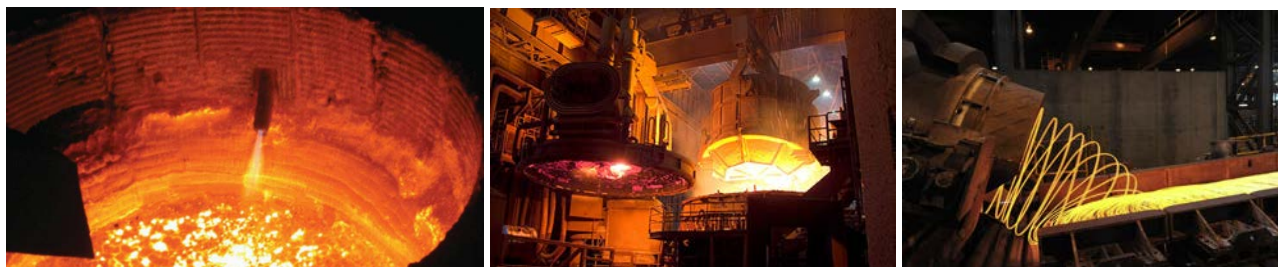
(a) Burner view inside EAF (b) Scrap charging into EAF (c) Wire rod rolling mill
